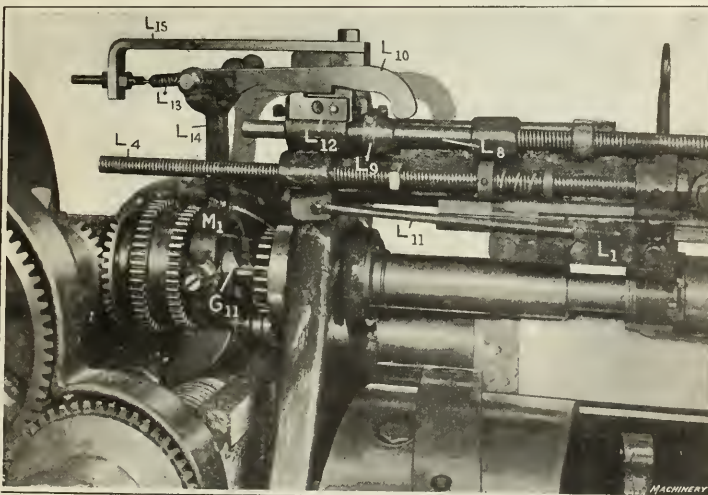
Arrangement of Die Mechanism for Left-hand Threading on Gridley Automatic Screw Machine
